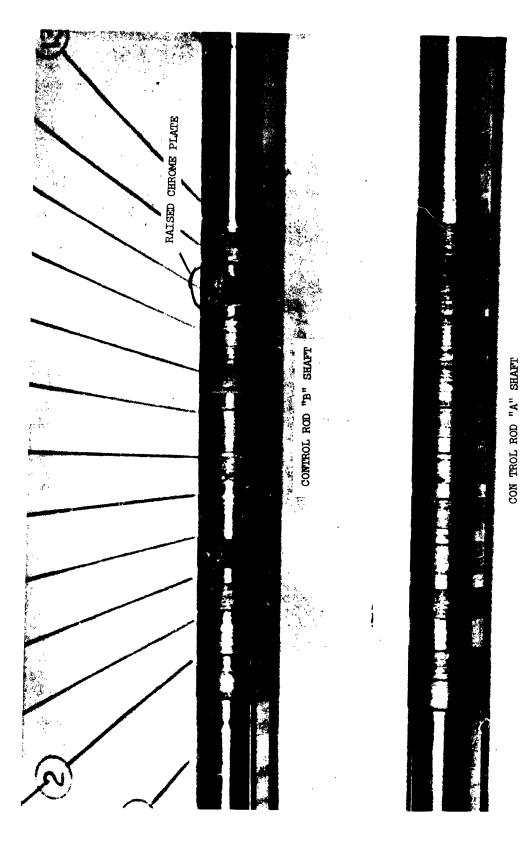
Quadrant IV - SM-1 Control Rods "A" & "B" Shafts
